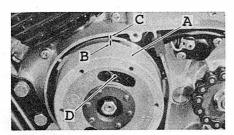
Point gap may be set by reaching through hole (D) in flywheel (A). Timing marks (B&C) will align when crankshaft is in correct position for ignition.
